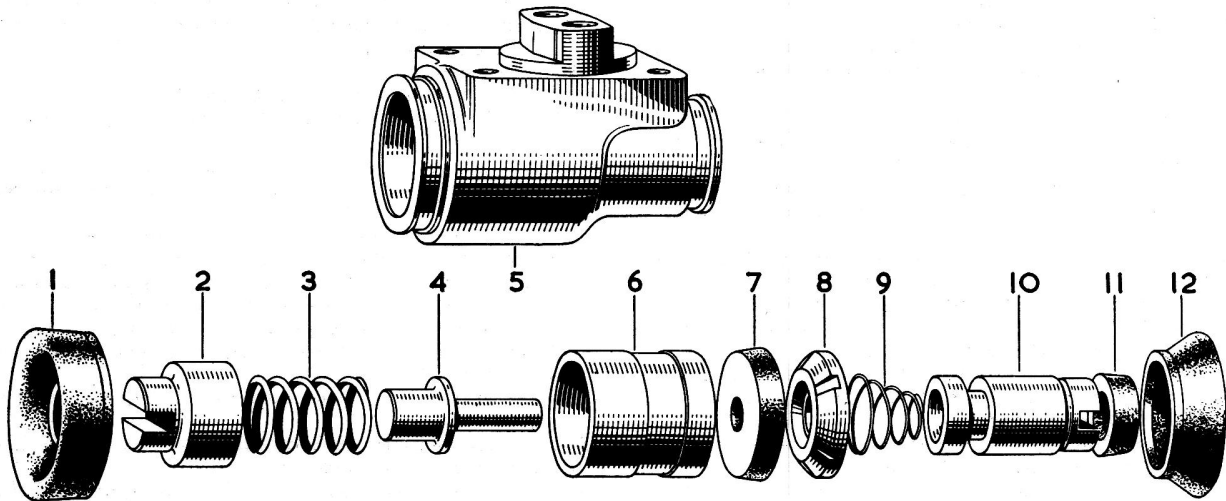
EXPLODED VIEW OF THE FRONT WHEEL CYLINDER
